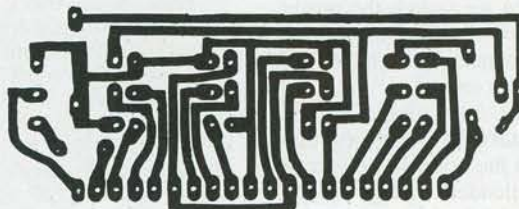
MOST OF THE control switches are mounted on this small board, Board 3. Note that this foil pattern is shown full-size.
